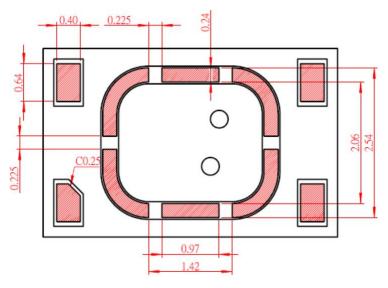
Suggested solder paste stencil pattern dimensions show in millimeters.
